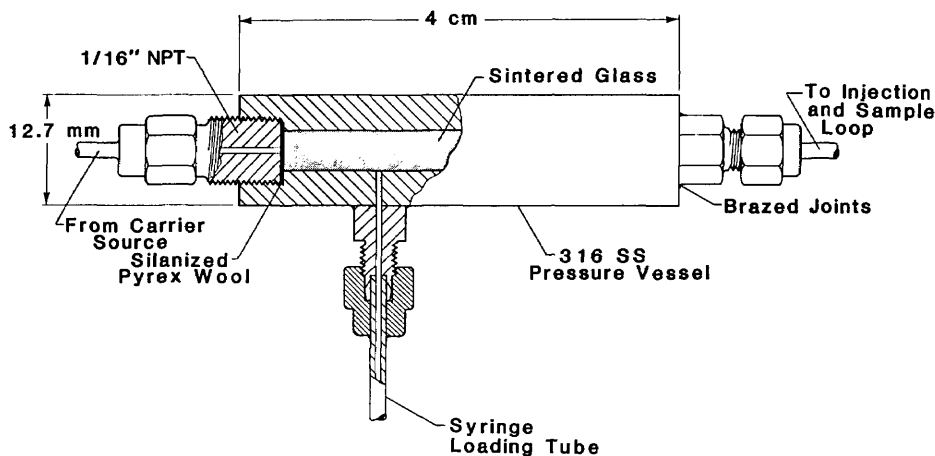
A schematic diagram of the extractor (which precedes the sampling valve). The manifold for this extractor is shown in figure 4.
